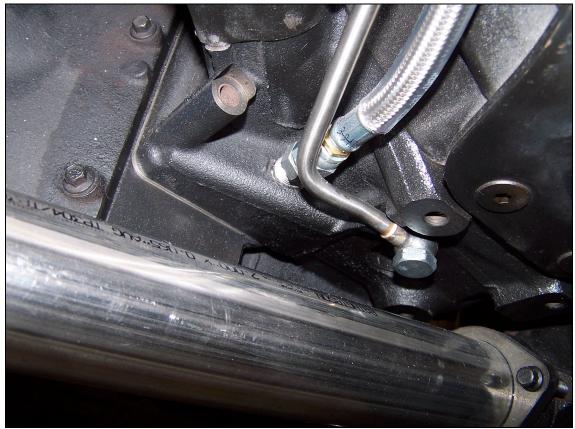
Passenger Side Line In Assembled Engine (note minor bend in fuel line for clearance)
